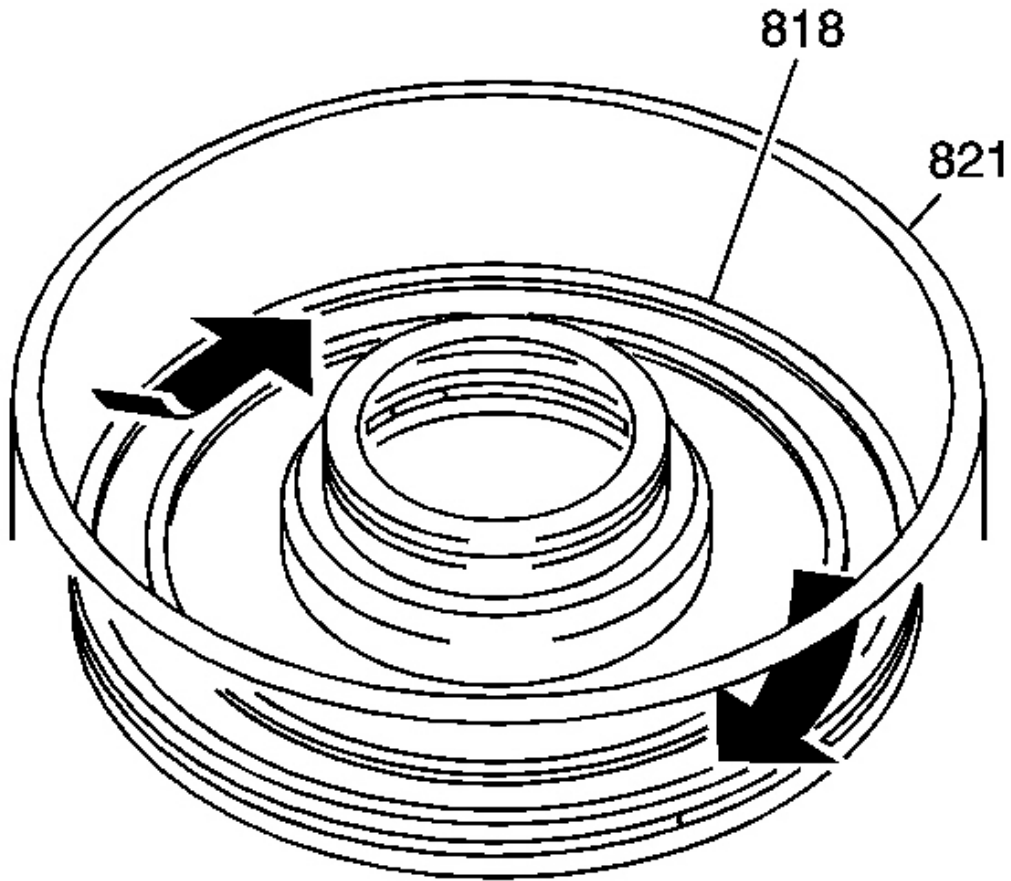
Installing 3rd Clutch Piston Assembly Into 3rd Clutch Housing
